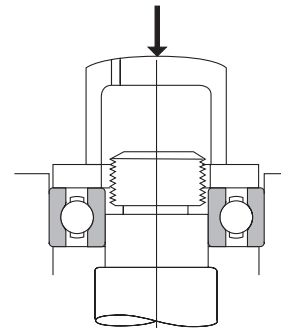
Simultaneous Press Mounting of Inner & Outer Ring
